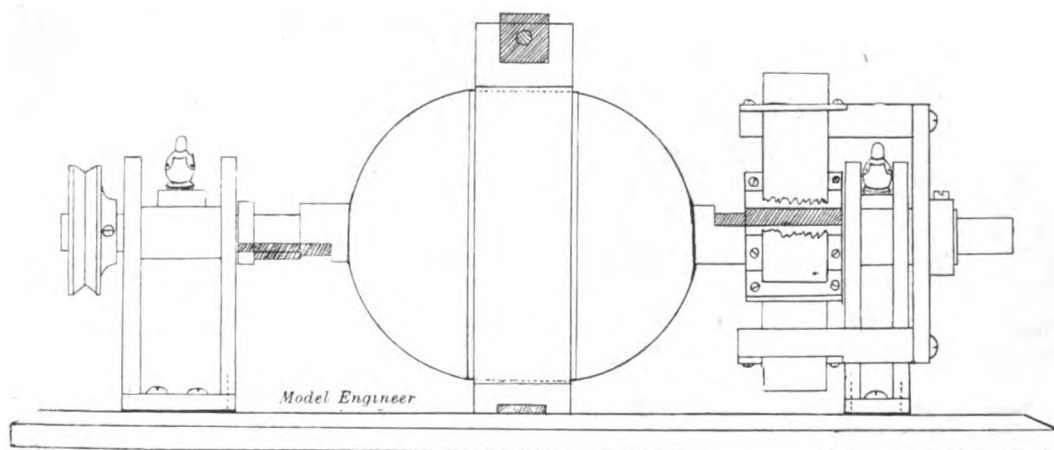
AN ELECTRO MOTOR BUILT WITHOUT A LATHE. (Side View.)
